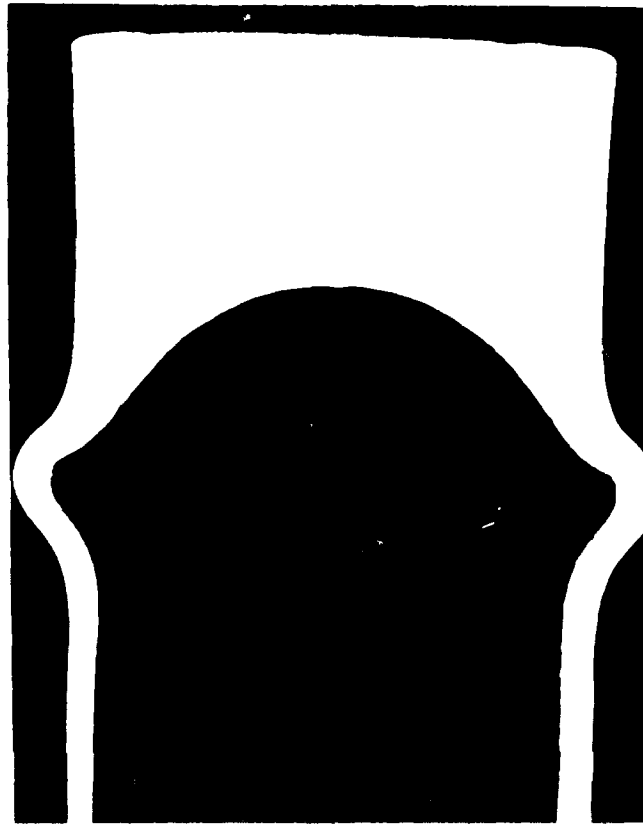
Section View of Smooth Wall Penetrator (P-N) After Impact on Concrete Target at 2490 ft/s.
